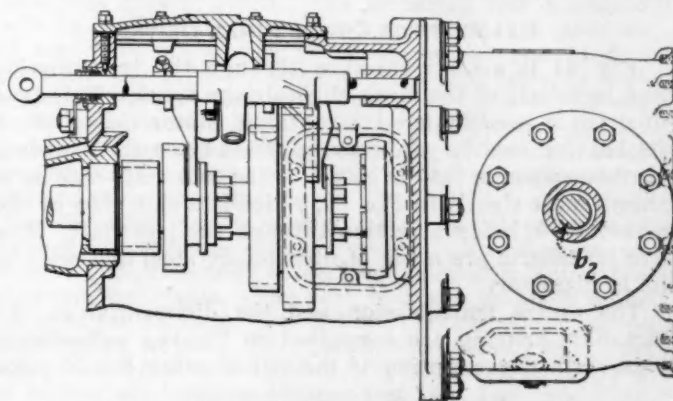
A SIDE VIEW OF THE ASSEMBLY OF THE CHAIN-DRIVEN AXLE ILLUSTRATED IN FIG. 31
